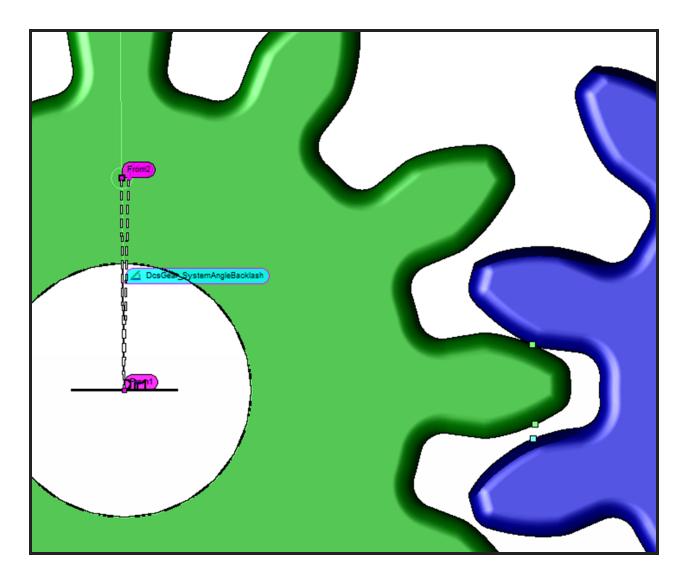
The angular backlash measures the amount of angular clearance between the Nominal Gear teeth and the Tolerance Gear teeth. The Drive direction is Clockwise for the green gear. The bearings are at a fixed distance apart. The angular backlash measures the angle of clearance between the Nominal Gear teeth and the Tolerance Gear teeth.
